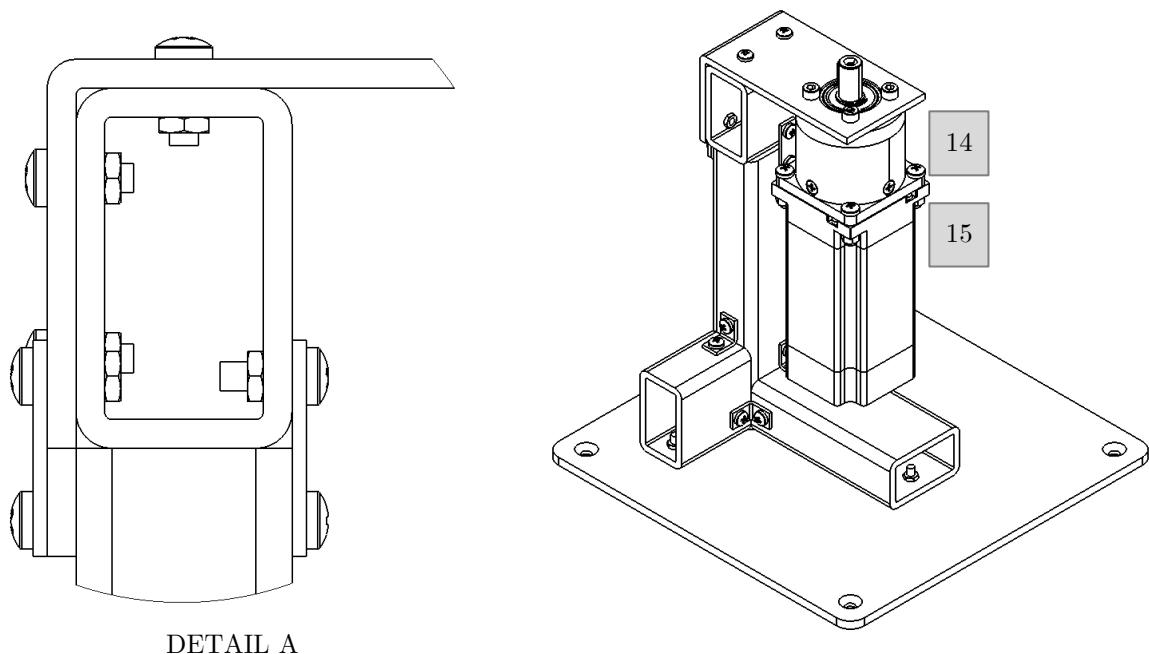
Detail A and isometric view of motor and machine base assembly showing gearbox and motor placement
